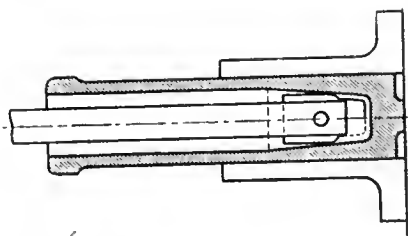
SMOOTHING BOTTOM OF HOLE.
